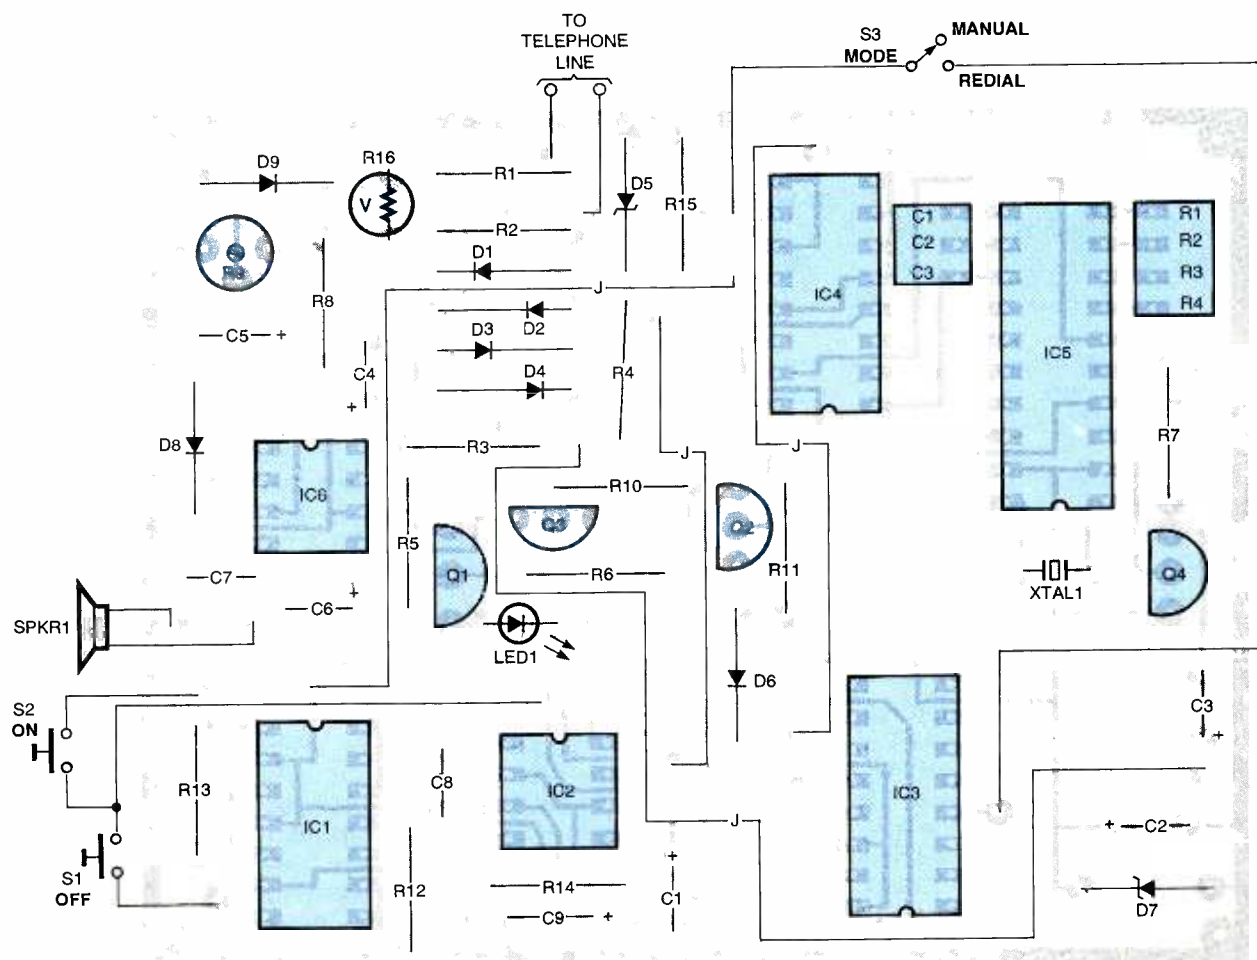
Once you've obtained all the parts listed in the Parts List, assemble the board guided by this parts-placement diagram. When installing the polarized components, be sure that they are properly oriented as shown.
